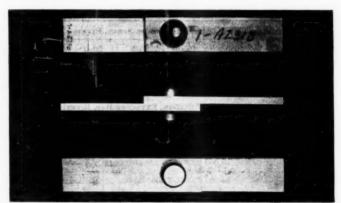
Type of Riveted Specimen Cut From Magnesium Alloy Extruded Specimens, 0.025 in. Thick.
